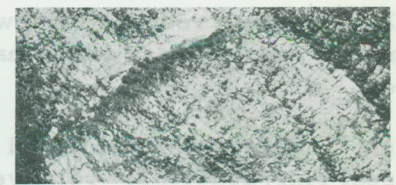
Fatigue Failure (Aluminum)
